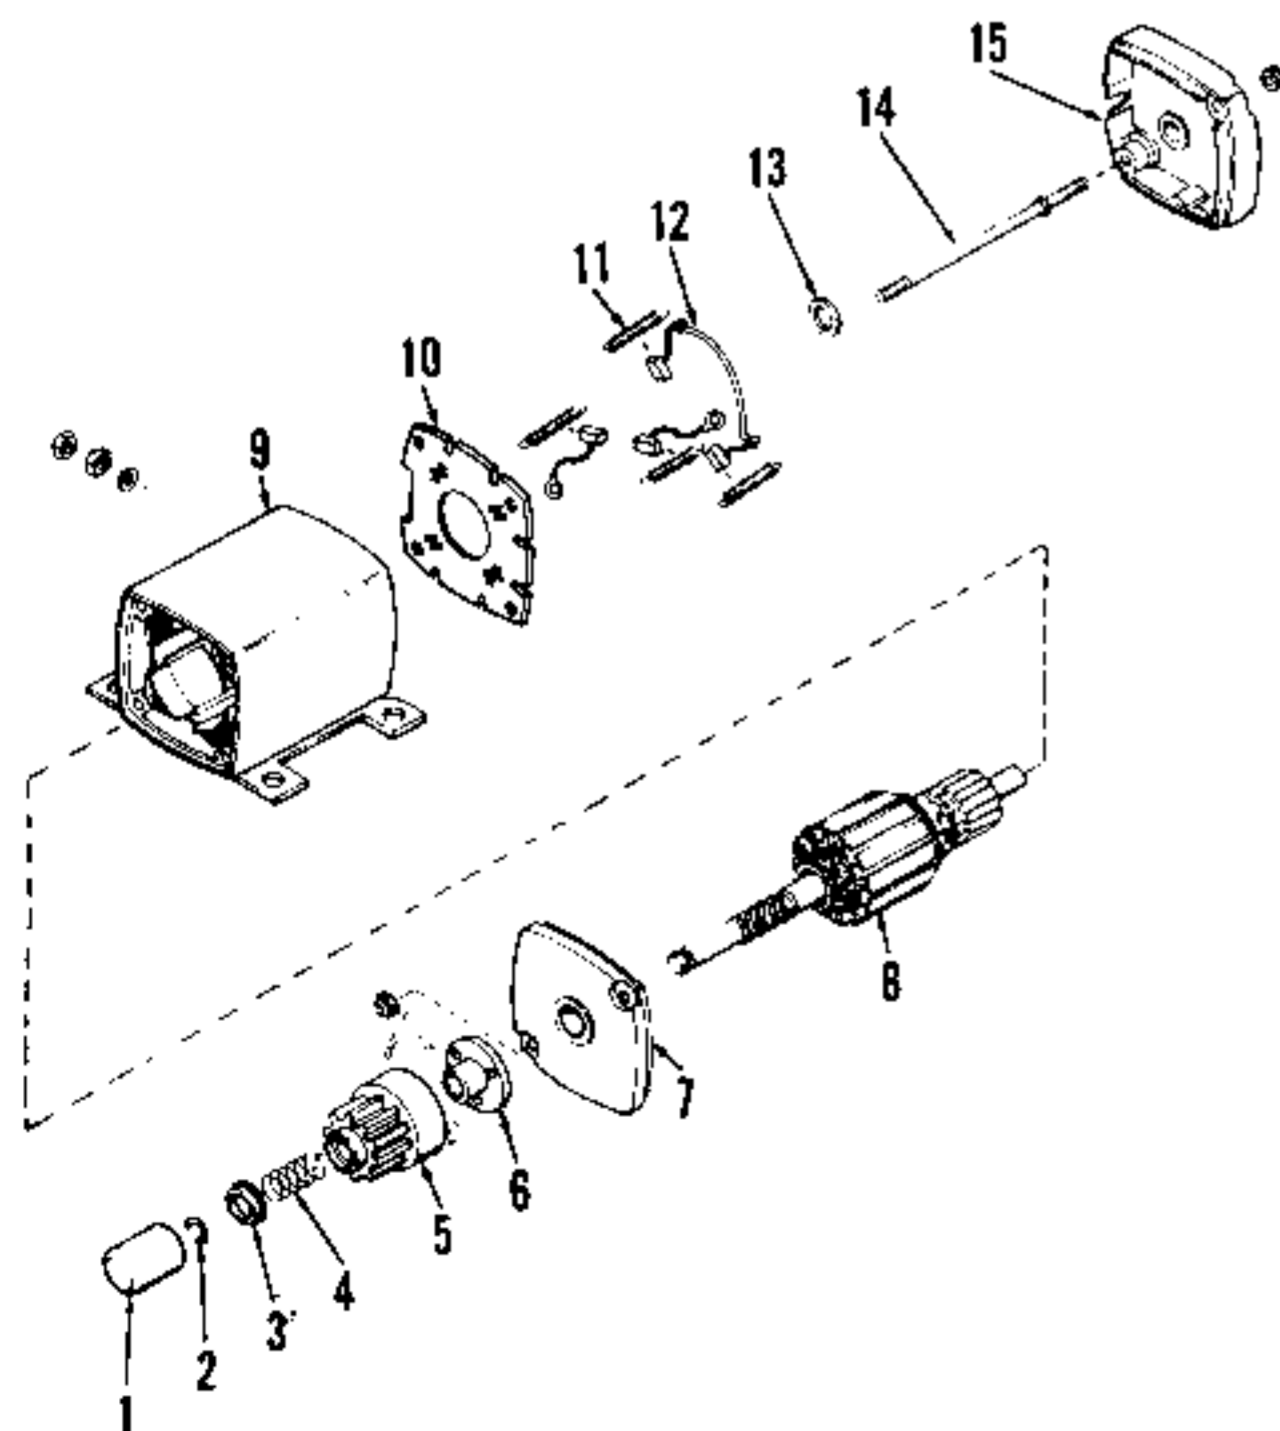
Exploded view of 12-volt starter motor used on some models.
